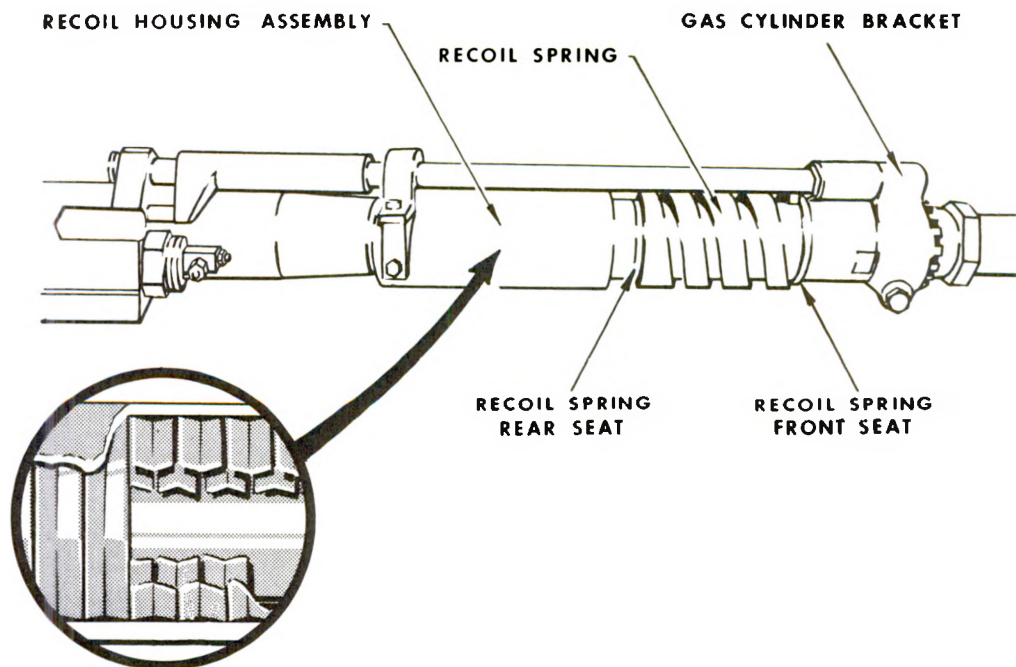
Installed arrangement of the recoil and gas mechanism assemblies.
